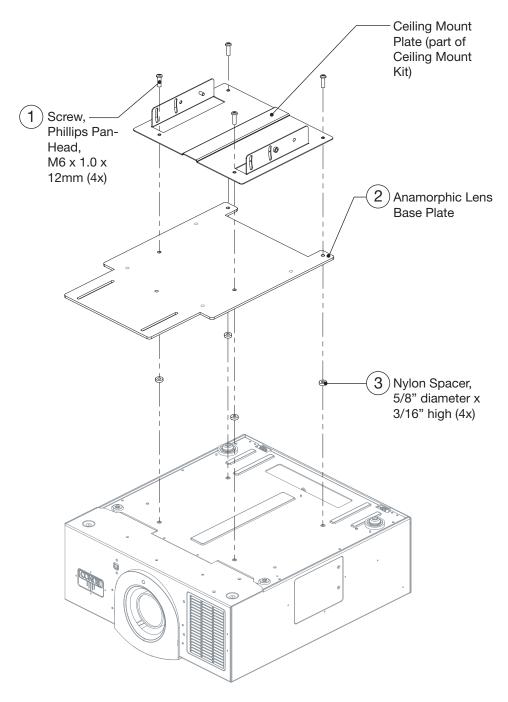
VX-3000 Ultra/CineWide with Rainier II/McKinley (Cylindrical) Lens Base Plate and Ceiling Mounting Plate - Exploded View
